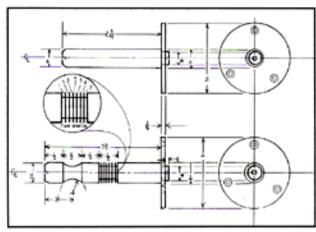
Drawing of the metal axle shafts on both ends of the barrel.
